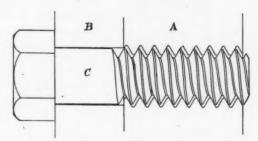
SCREW SMALLER THAN THREADED HOLE
